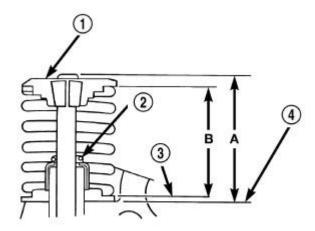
Valve Stem Seal - Removal Courtesy of CHRYSLER LLC
